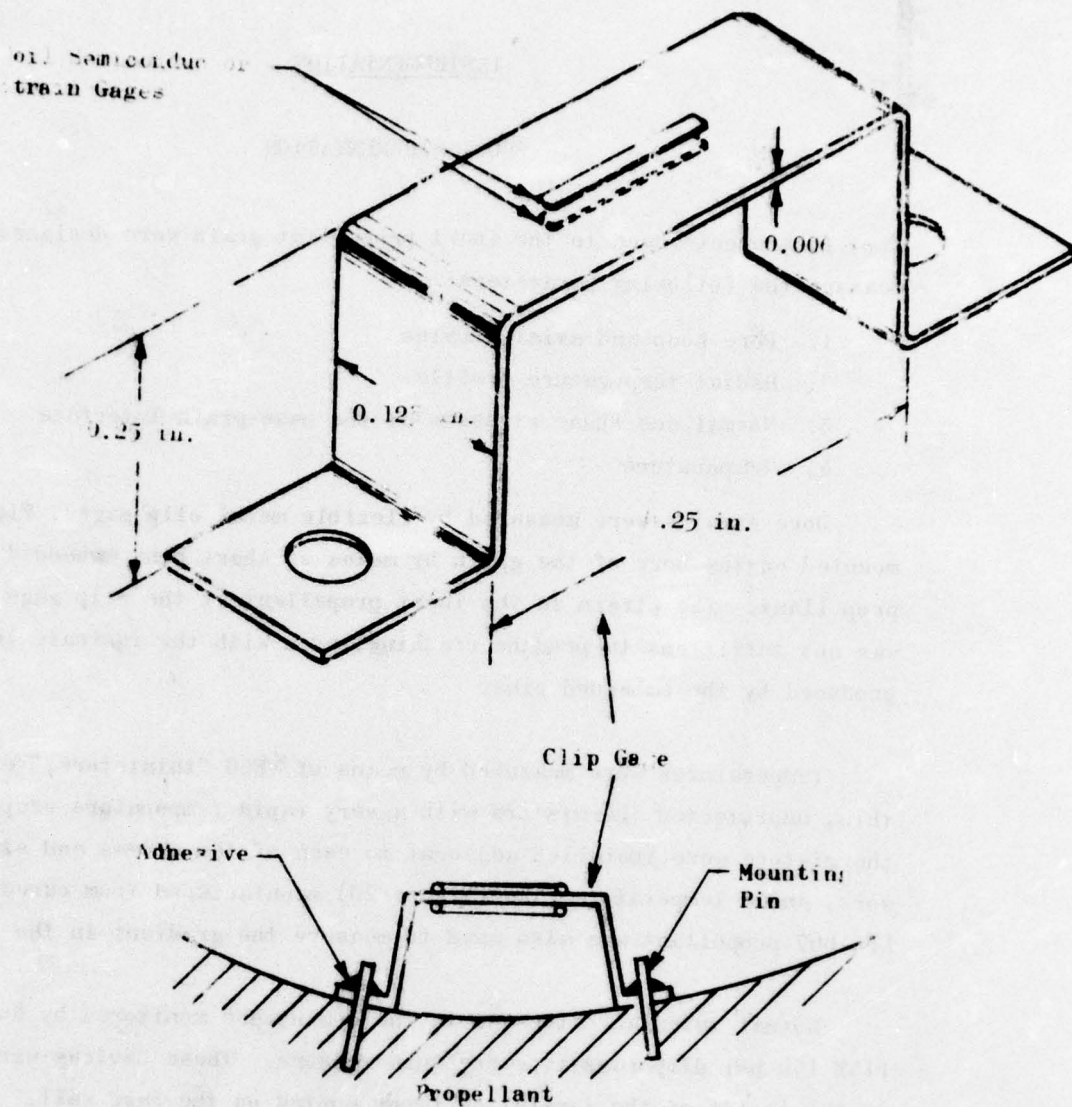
Clip-Type Surface Strain Gages Mounted on Bore of BDC
